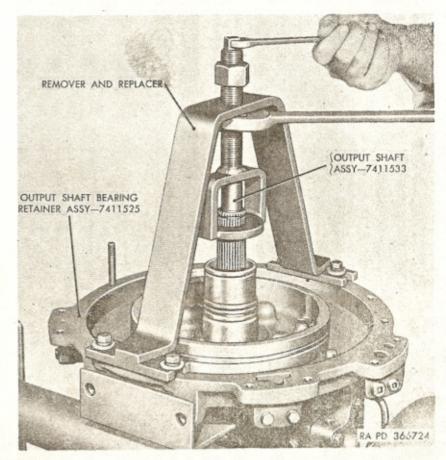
Removing output shaft bearing retainer assembly using remover and replacer-C7950563 (303M).
